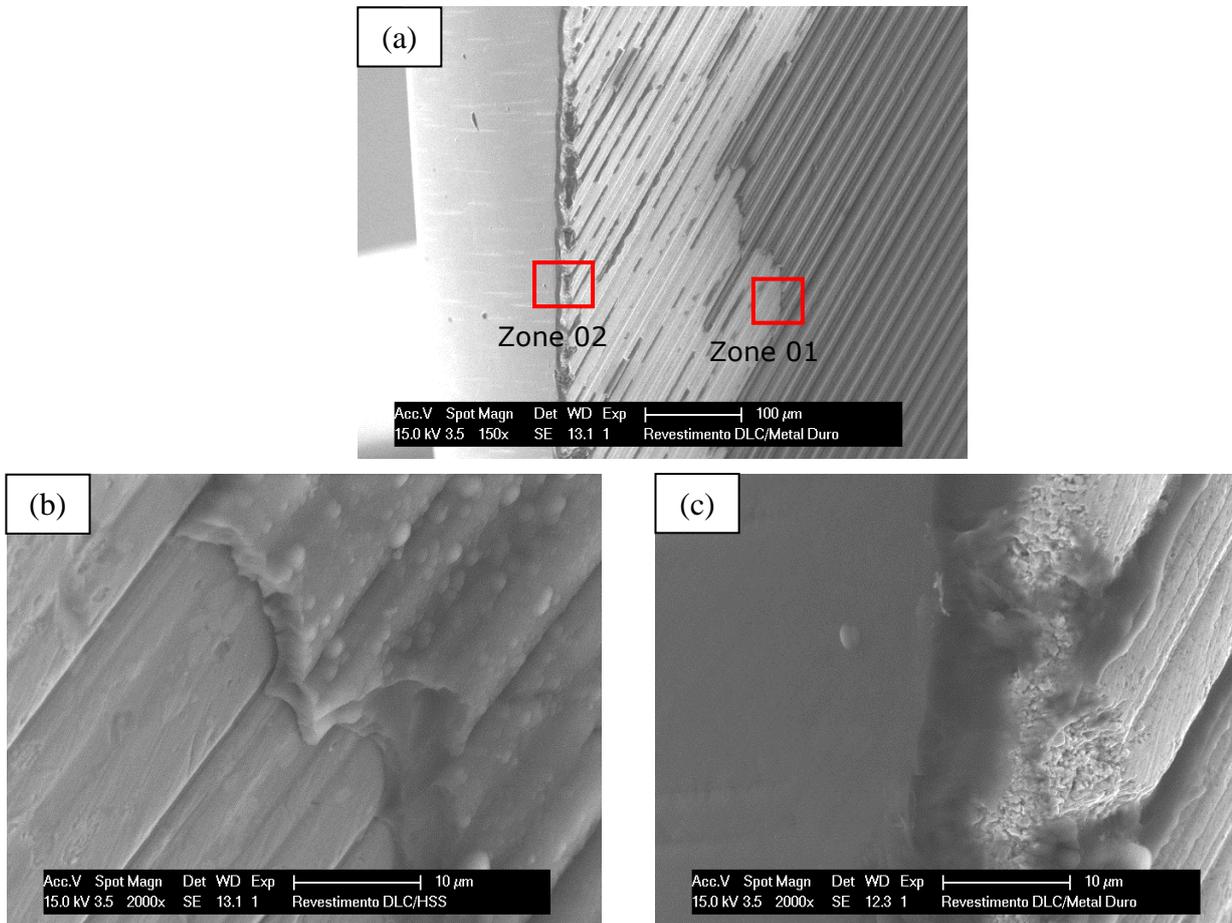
(a) Magnification by (SEM) of the secondary cutting edge of the tool. (b) Magnification of zone 01 in (a), which shows that the coating followed the surface profile. and (c) Magnification of zone 02 in (a) which shows failure by lack of adhesion at the edge by coating.
